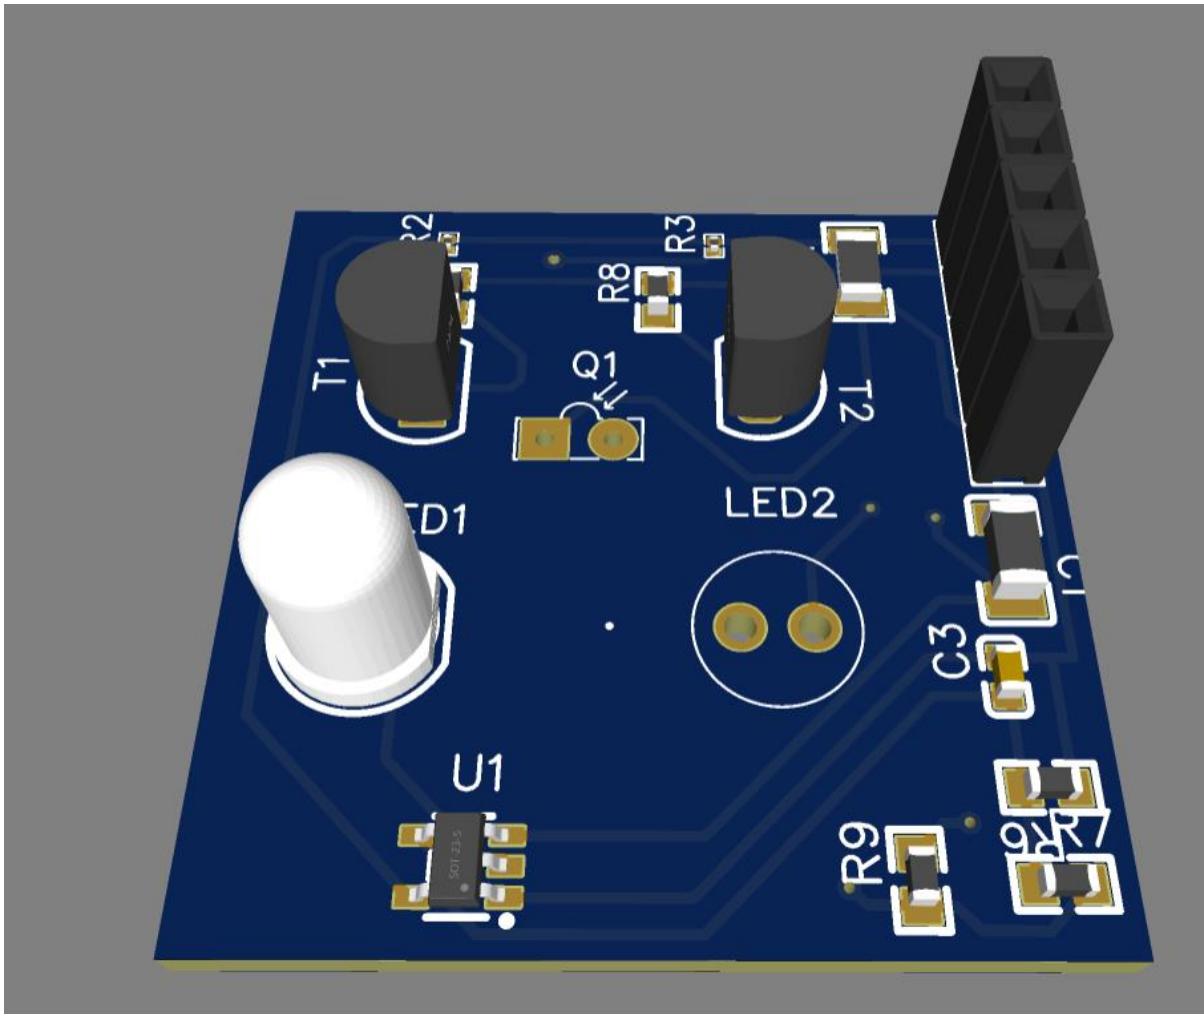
3-D view of the pulse oximeter PCB. Only one LED (IR) is shown, but the red LED and the photodiode will be soldered by us.
